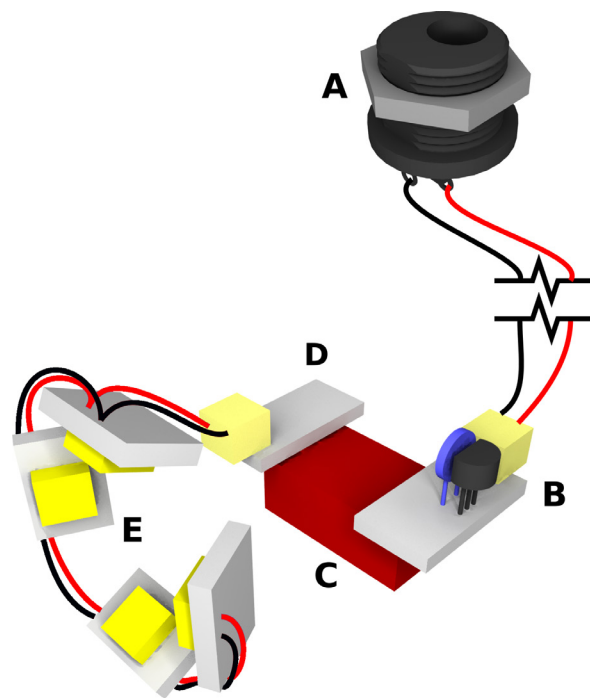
Lighting components: A, barrel connector; B, LED driver input printed circuit board with components; C, LED driver; D, LED driver output printed circuit board with component; E, four LED printed circuit board assemblies. Components are not to scale.
